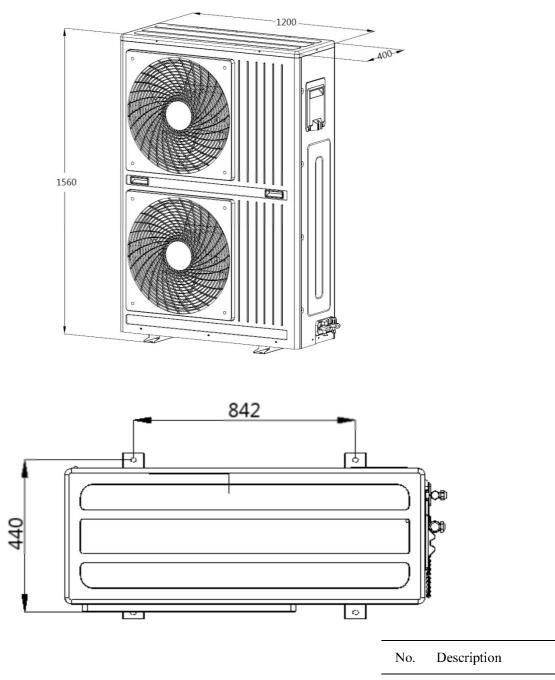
External Dimensions and Hole Dimensions of 38kW outdoor unit
